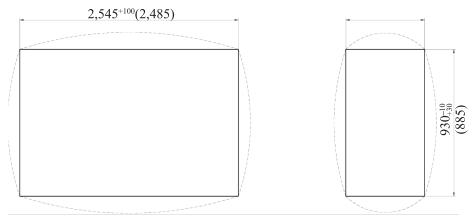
Sketch of a large-sized forging made of alloy 1933
